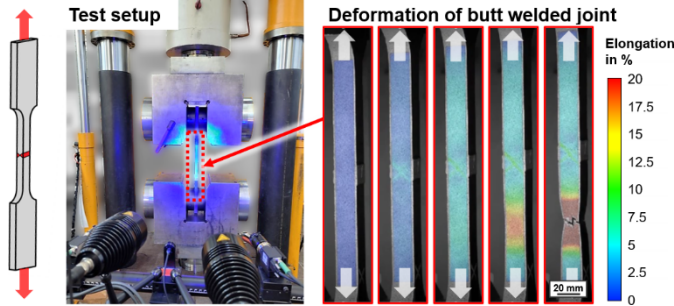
Experimental setup for tensile tests of butt welded joints with optical local extension measuring; S960QL (t20), double-V, G89
